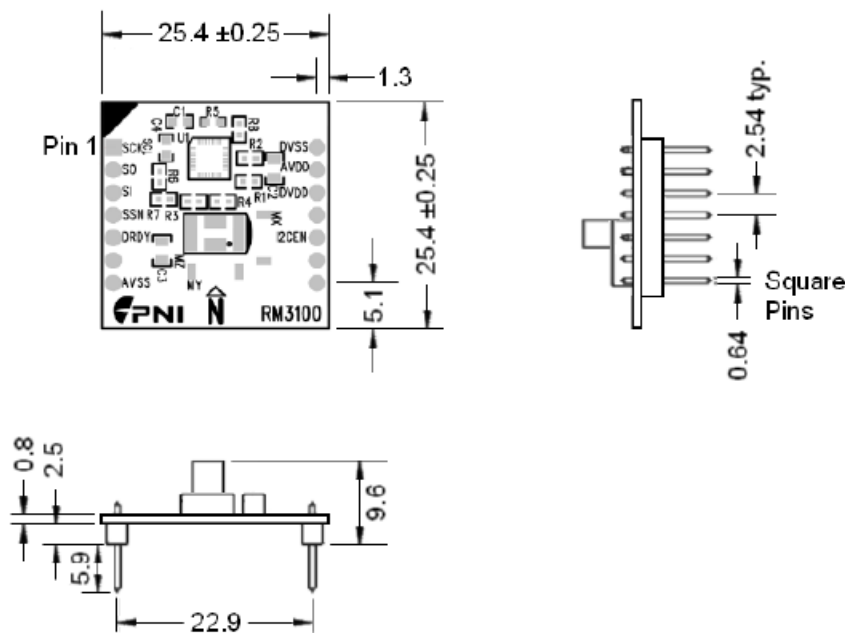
RM3100 Evaluation Board Mechanical Drawing
